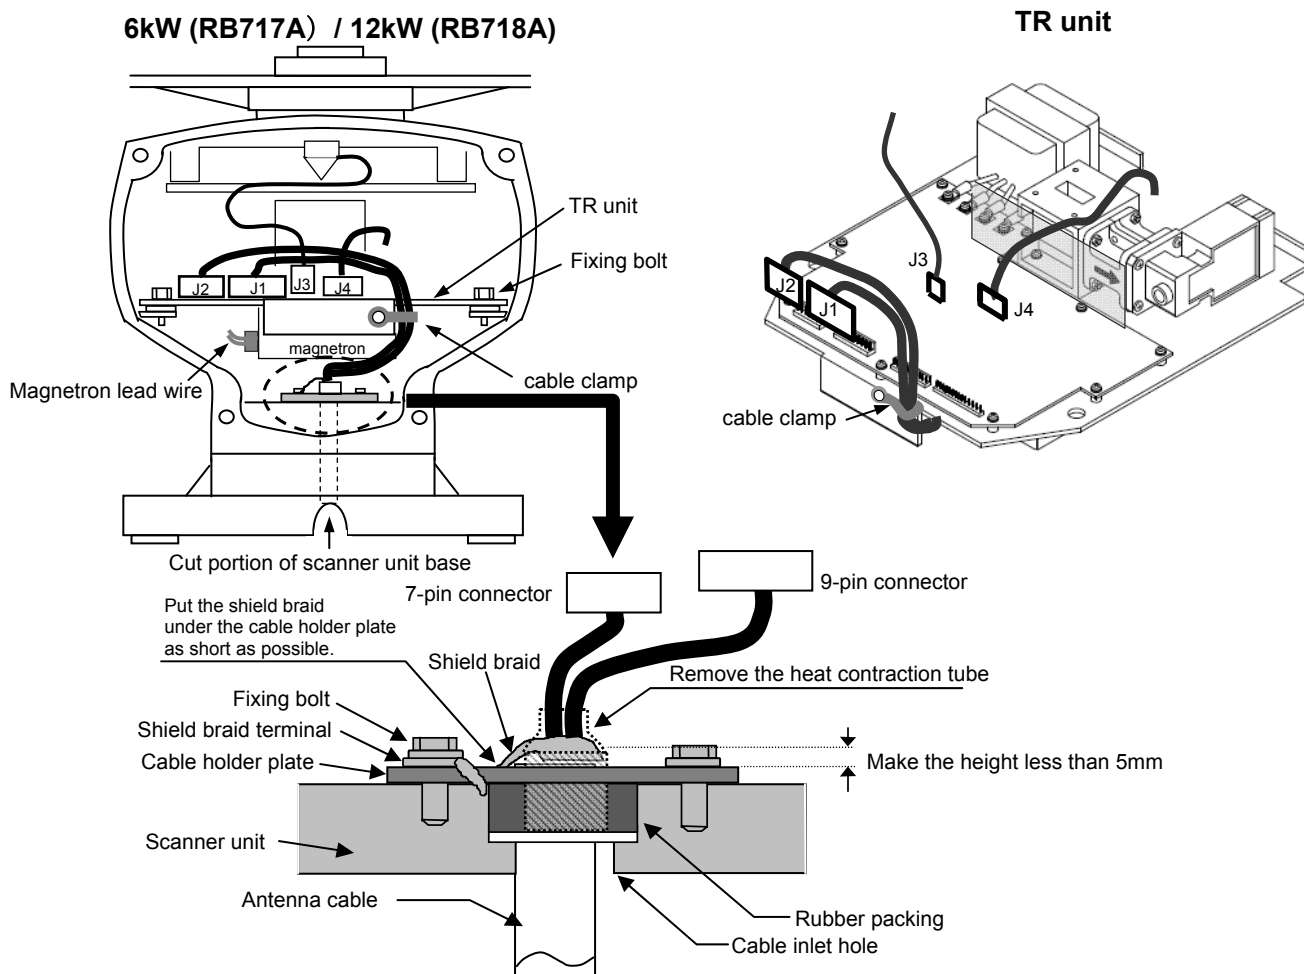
Connection of cable to Scanner Unit (RB717A, RB718A)
